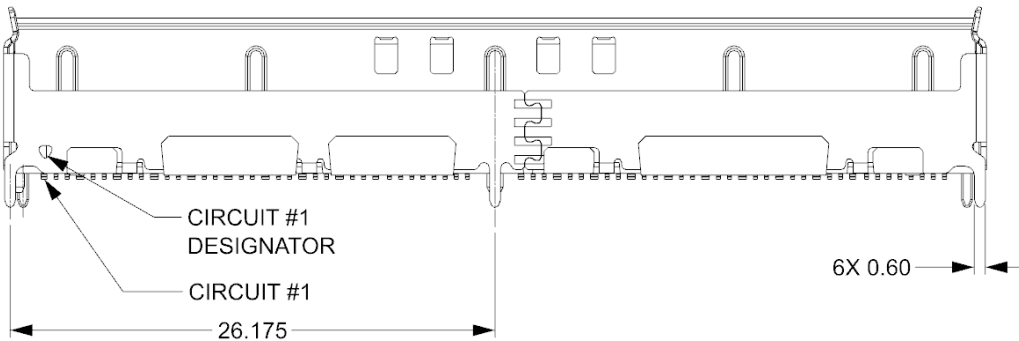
Dual-Bay Front View of Fixed-Side Connector Cage
